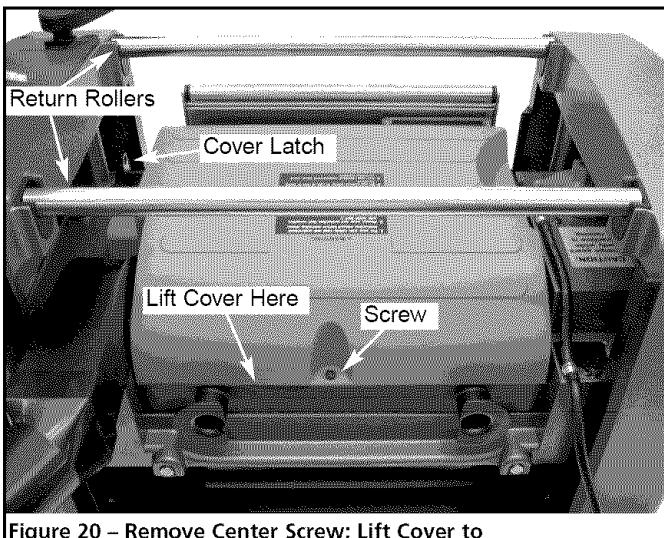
Remove Center Screw; Lift Cover to Access Cutterhead
